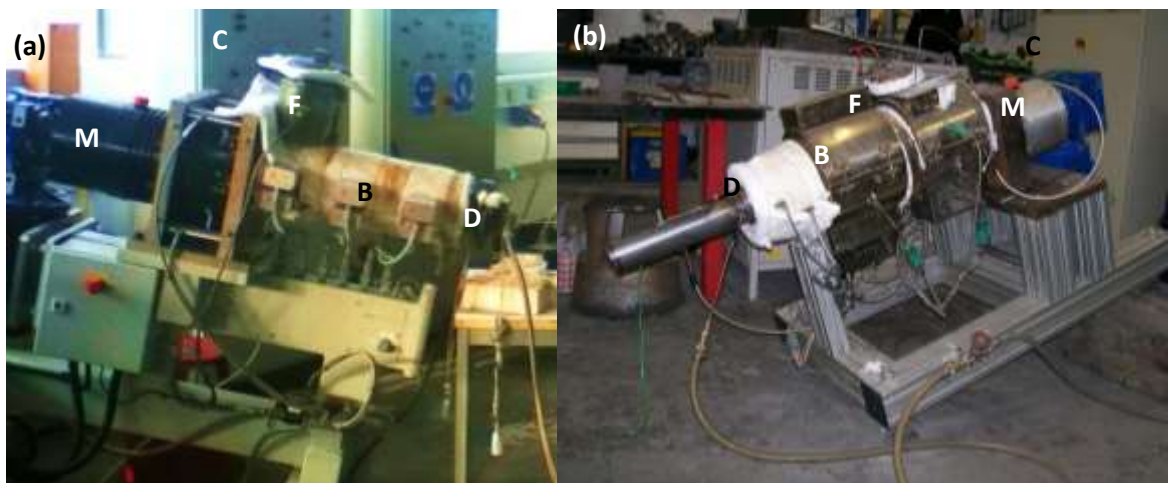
a) Aluminium Extruder b) Magnesium Extruder
